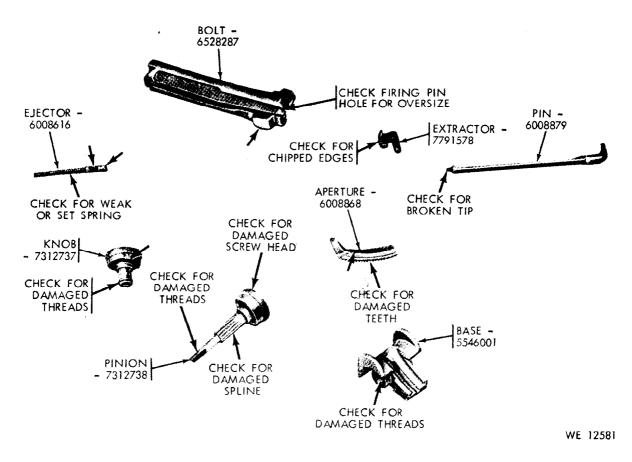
Inspection points of component parts of bolt assembly and rear sight group.
